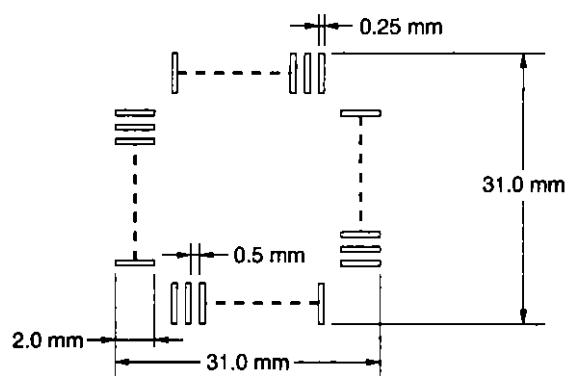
Recommended Mounting Pattern on Printed Circuit Board (reference)
